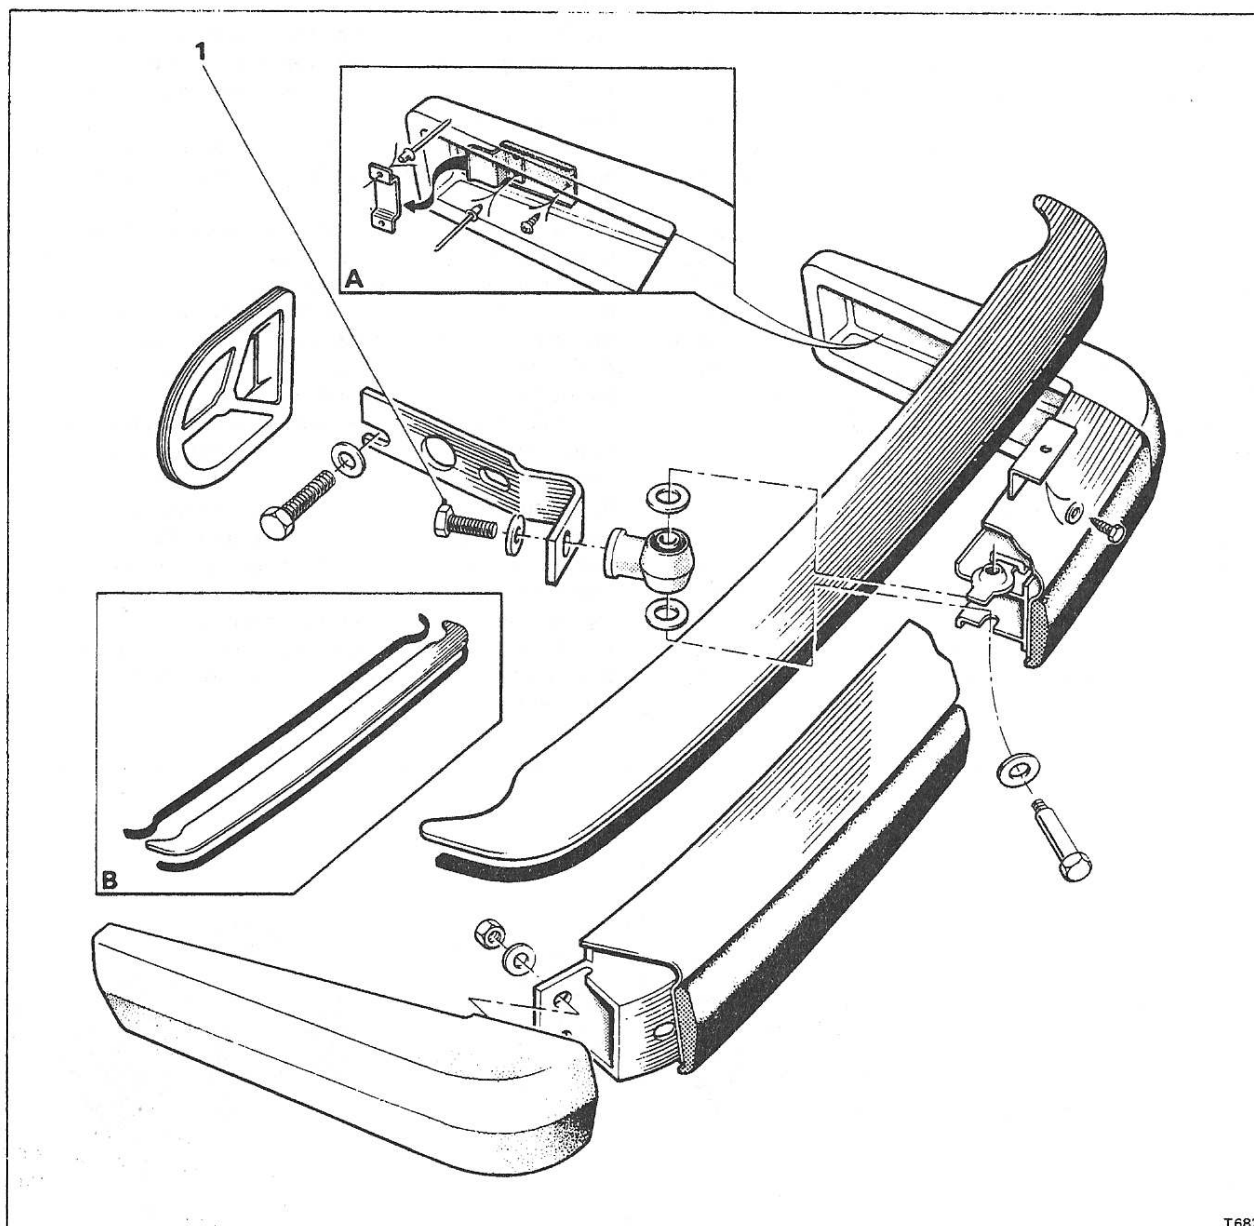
Rear bumper assembly [Silver Shadow II, Bentley T2 Silver Wraith II and Corniche (Prior to car serial number 50 001) cars]
